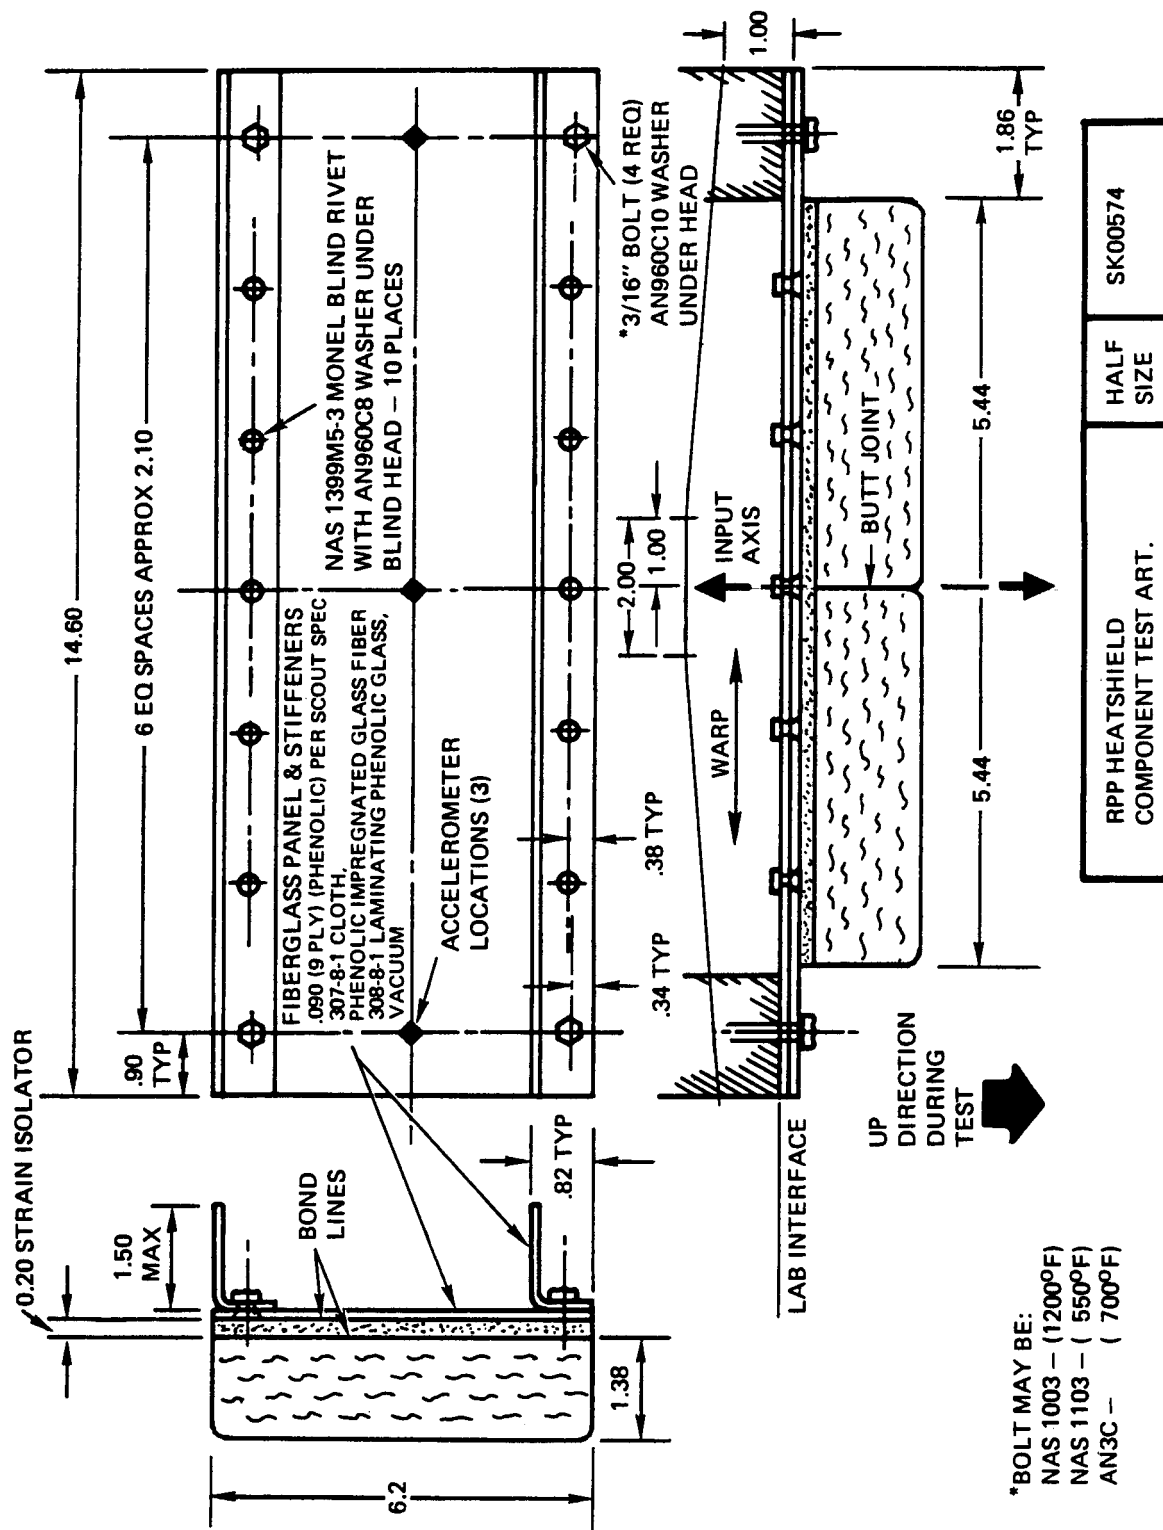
INITIAL HEATSHIELD TEST COMPONENT
